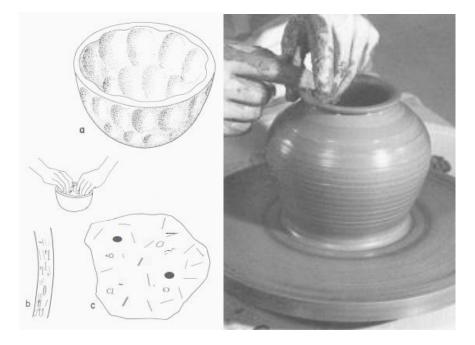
Forming by Hand and Throwing on a Wheel (Velde & Druc 1999, 37,70)
